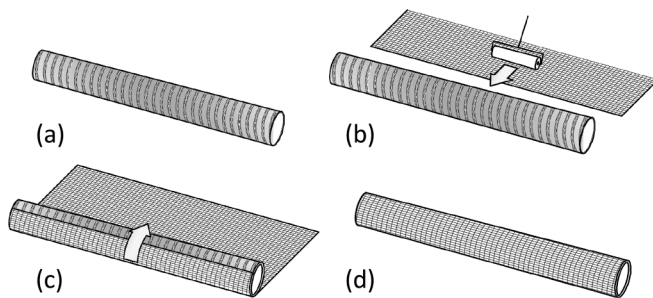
Preparation of G-FRP and C-FRP sleeves: (a) Corrugated aluminum tube; (b) Applying epoxy resin on the FRP sheets; (c) Wrapping of aluminum tube with FRP sheets; (d) FRP sleeve.
